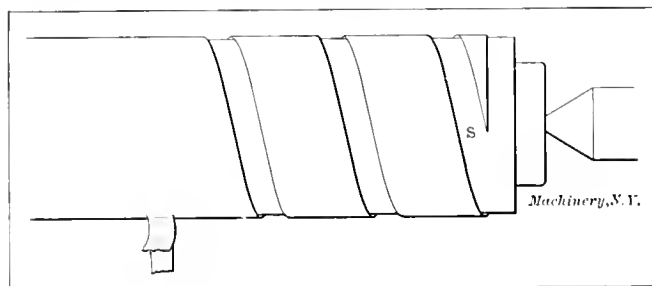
Tool taking the First Cut on a Double-thread Screw
